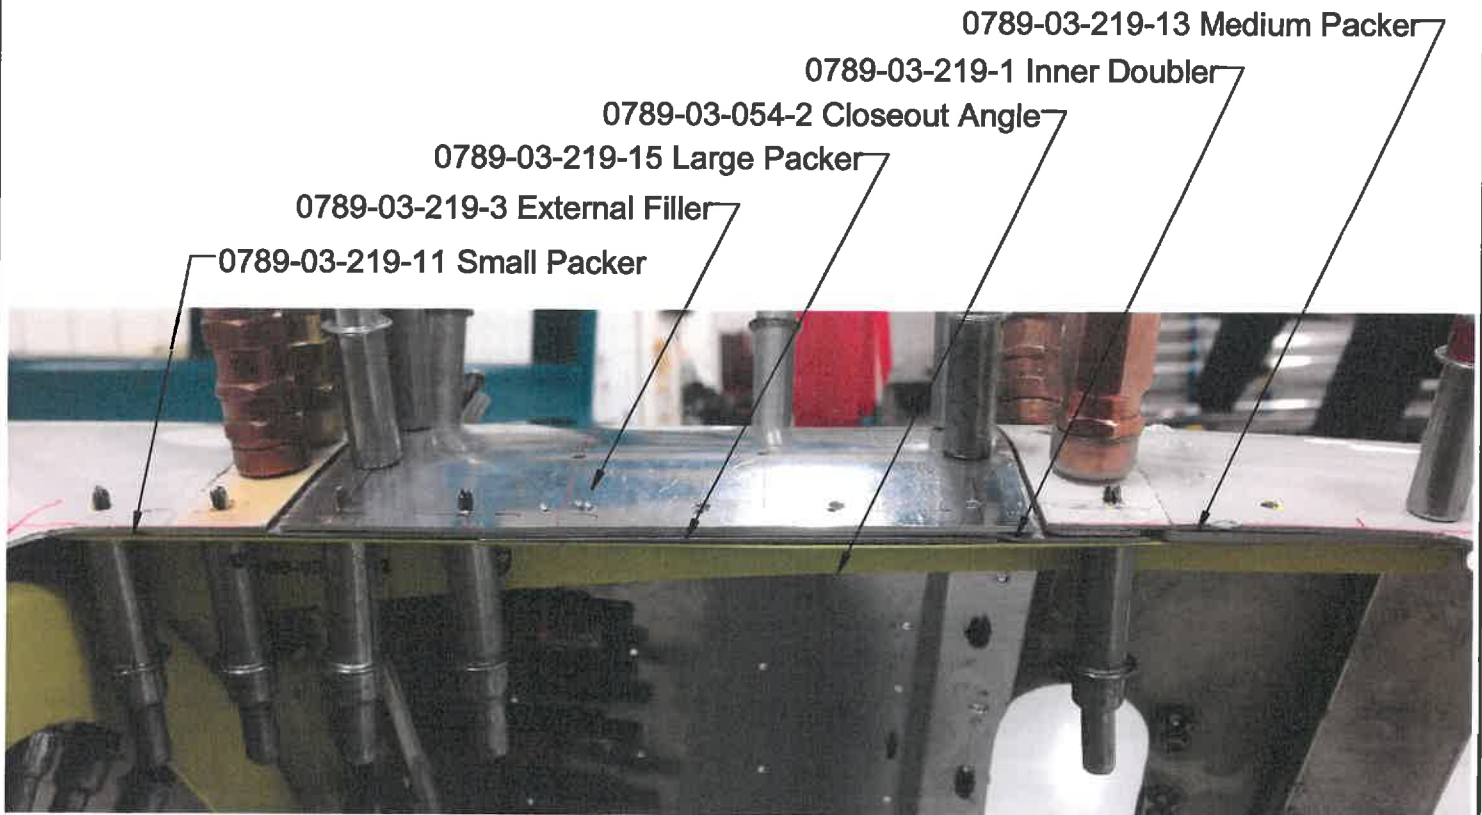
0789-03-219-11/-13/-15 Packer Installation
